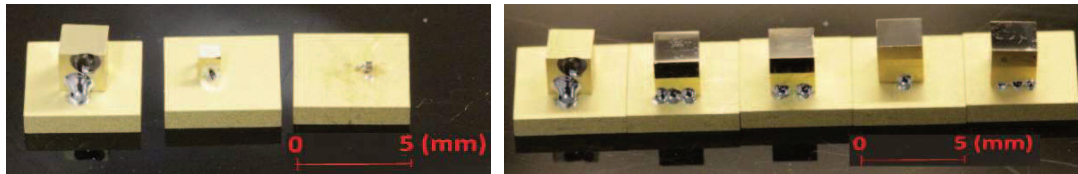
Different sizes of manufactured and soldered FS cubes. Left image, different soldered cube sizes (2 mm, 1 mm and 0.3 mm sided cubes) soldered with different soldering alloy diameter sizes (760, 400 and 300 μm). Image onto the right, different 2 mm side cubes soldered with different amount and size of soldering bump's.
